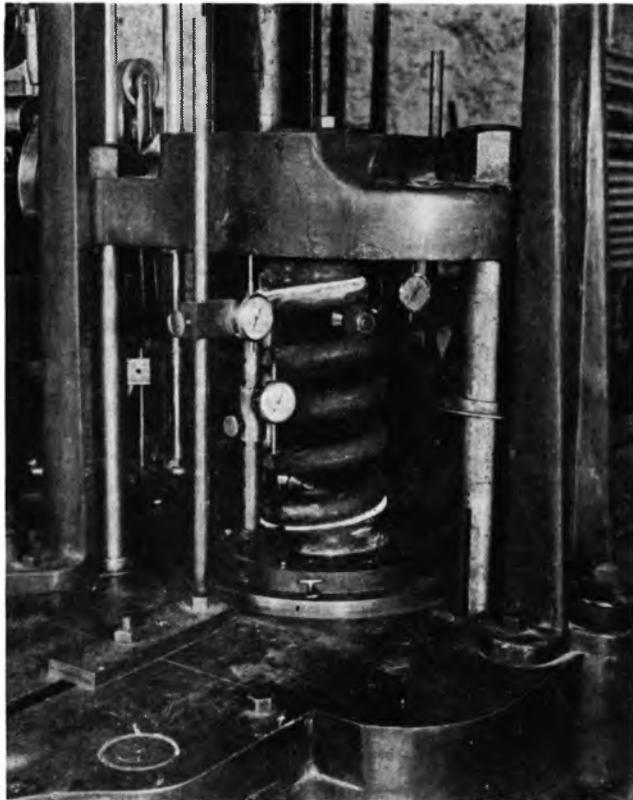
METHOD OF MOUNTING SPRING LENGTHS IN TESTING MACHINE
